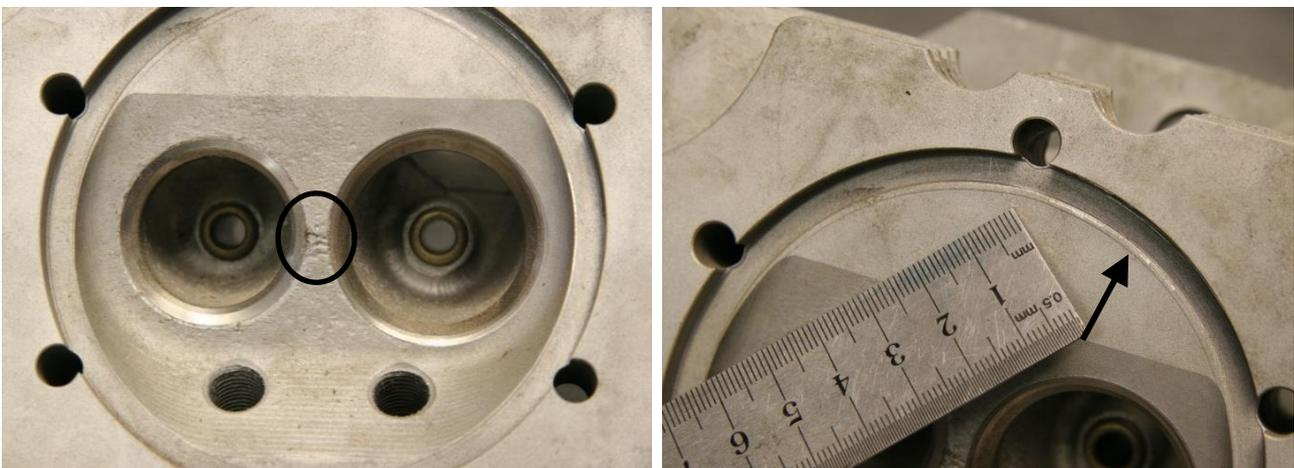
Cracking Between Valves, Recessed Cylinder Spigot
